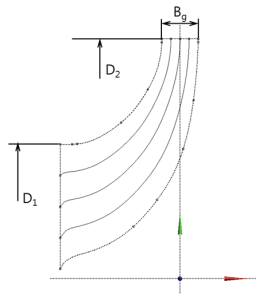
Meridional shape of 3kW class pump turbine impeller
